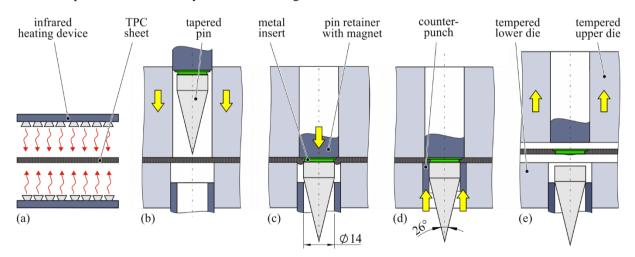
Schematic illustration of the process-integrated embedding of inserts into TPC components during compression moulding: (a) heating up the TPC sheet, (b) closing of the compression mould, (c) movement of the pin tool, (d) recompressing the squeezed-out material by the counterpunch and (e) demoulding of the TPC component.
